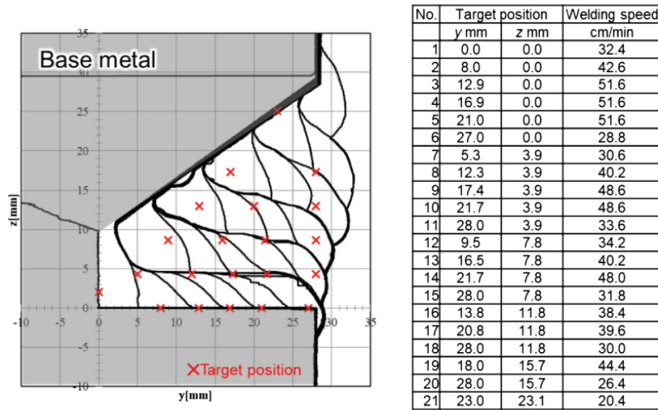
Weld bead shape in experimental result and welding condition (28 mm, gap 7 mm).
